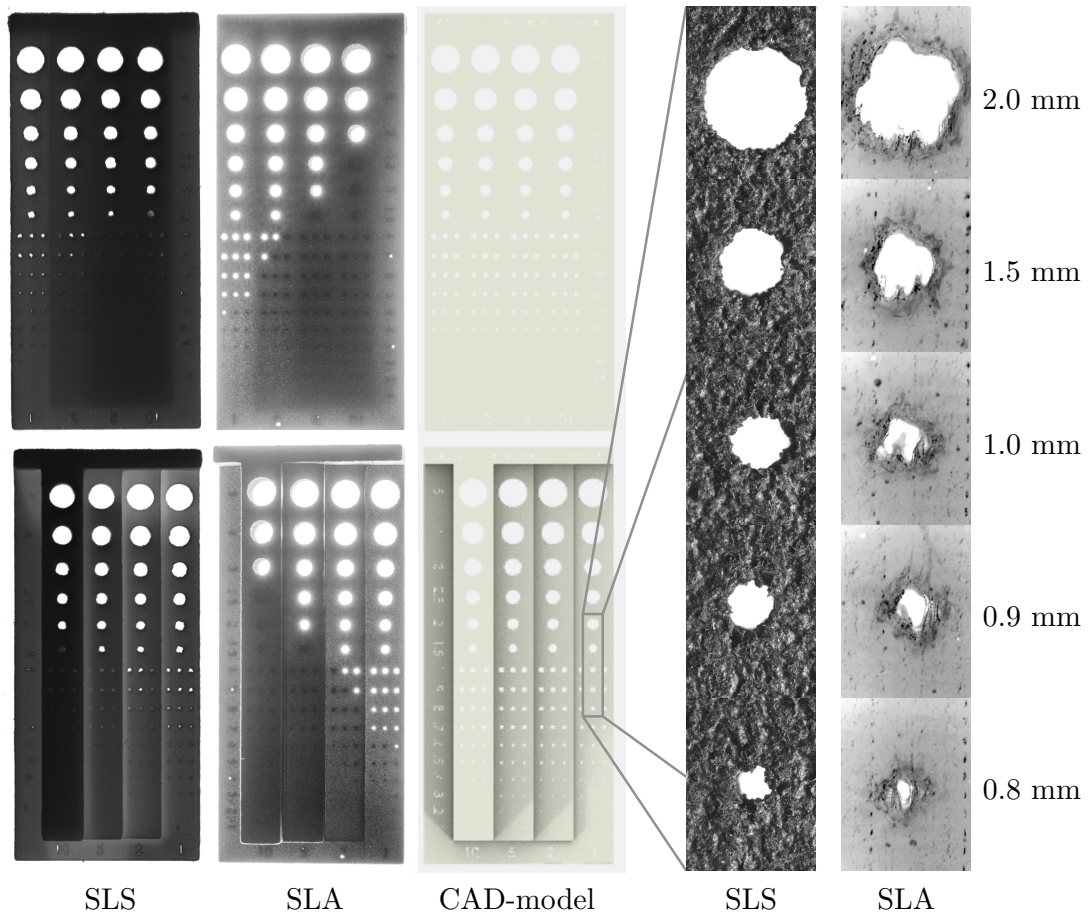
Back-lighted test prints for circular holes in plates of different thickness using SLS (plastic) and SLA (resin). The rendered CAD model is shown in white. We find that the smaller the hole diameter and especially the deeper the hole, the less well the tubes are resolved.
